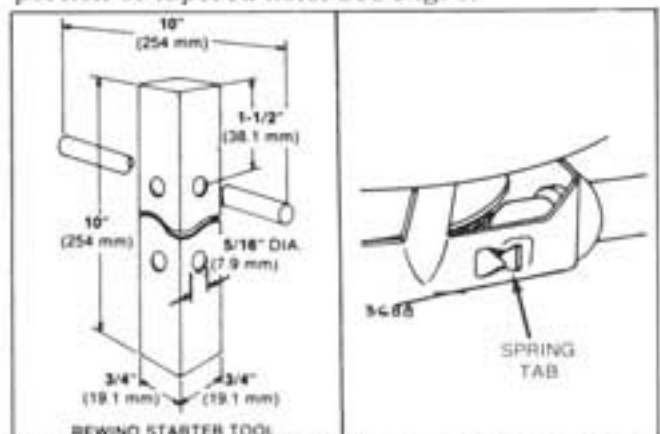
Spring Winding Tool Fig. 5 — Spring Tab Properly Installed
